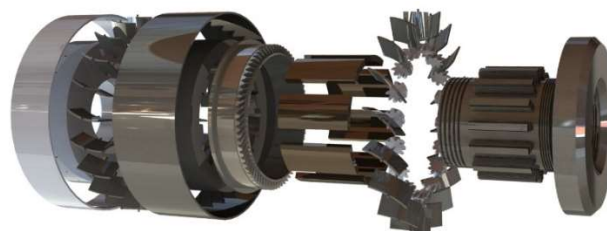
Exploded View of the Downhole Variable-Angle Hollow-Shaft Turbine Generator
